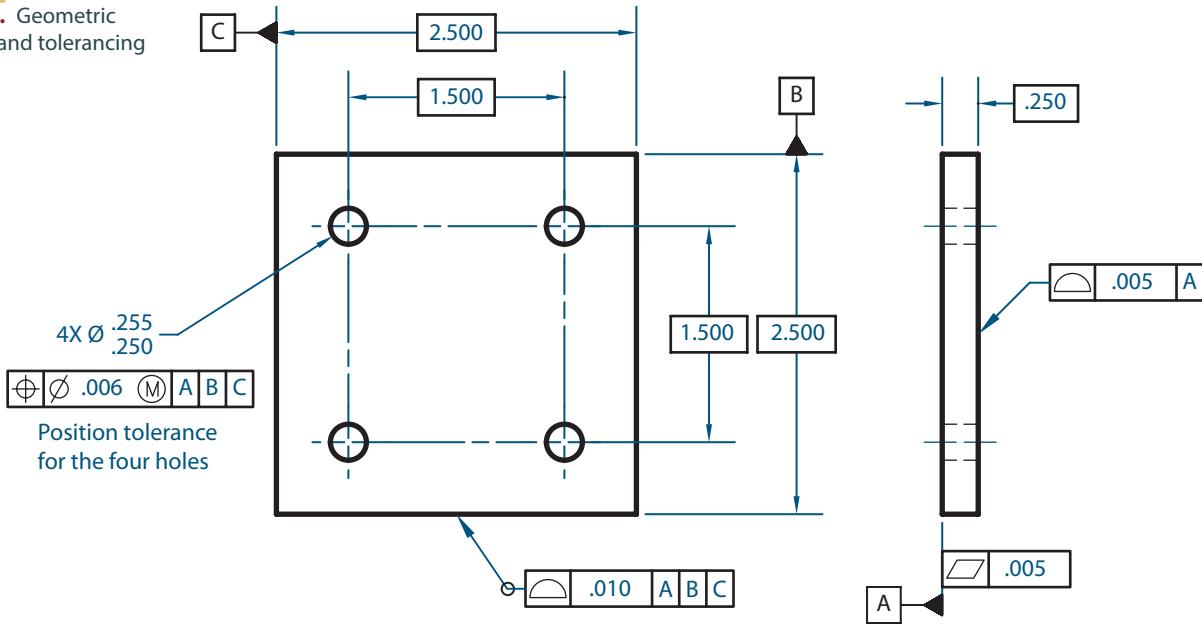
shows the same part as Figure 13.34 with the four holes except that it is dimensioned using geometric dimensions. Look at how the holes are dimensioned on
